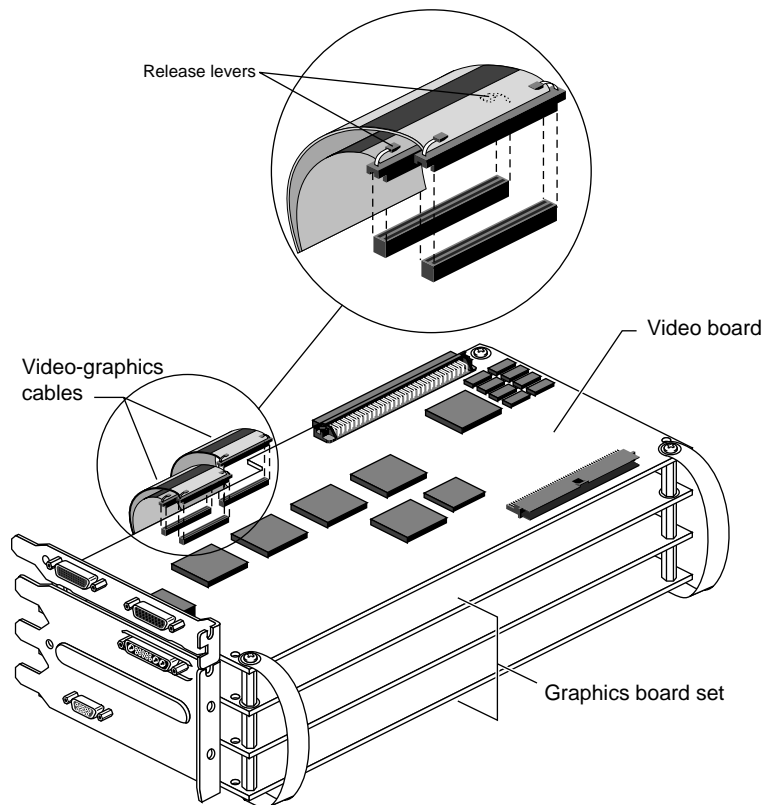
Attaching the Video-Graphics Cables to the Video Board
